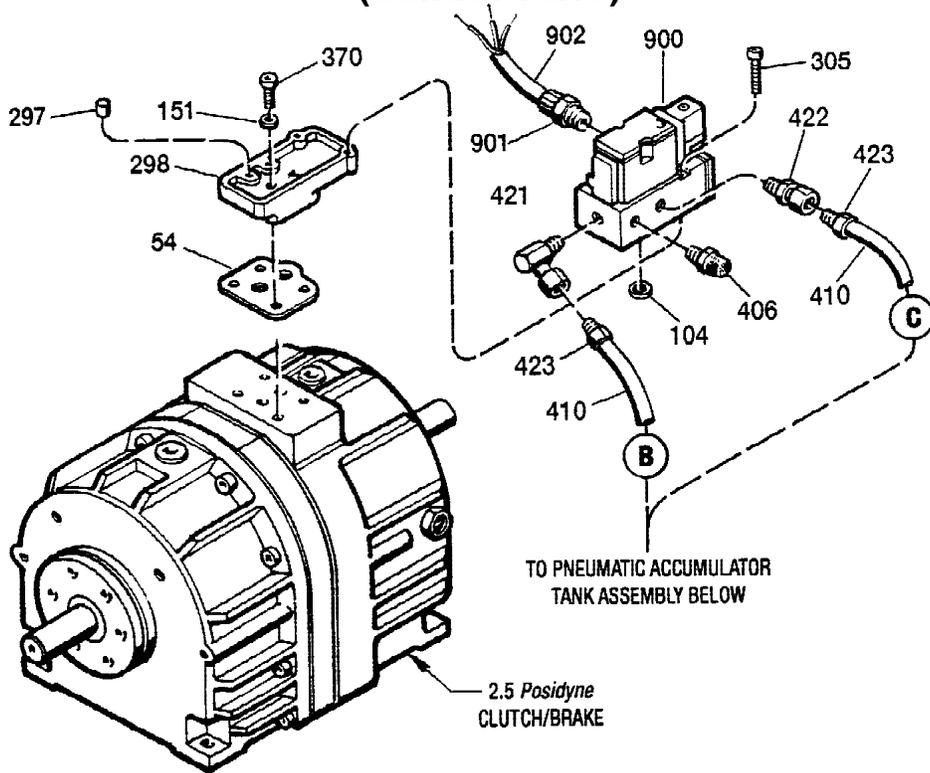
Differential Line Driver Encoder and Cut-Off Actuator Assembly
